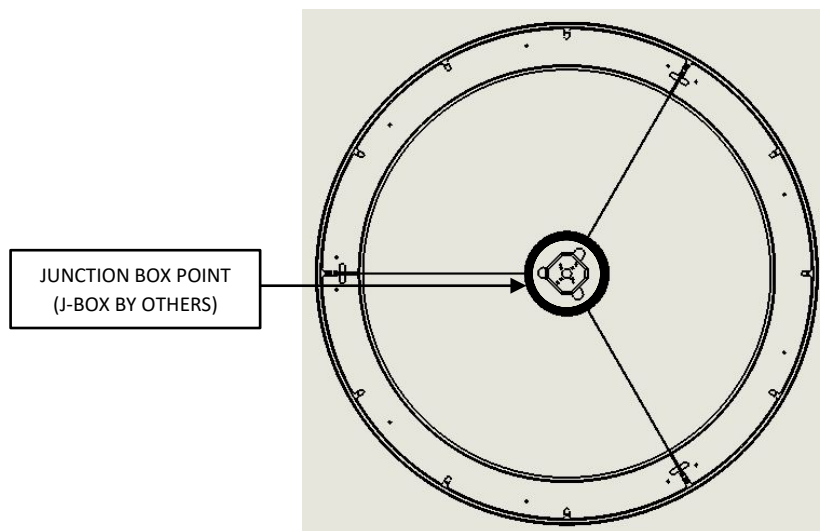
TOP VIEW SHOWING MOUNTING VIEW
